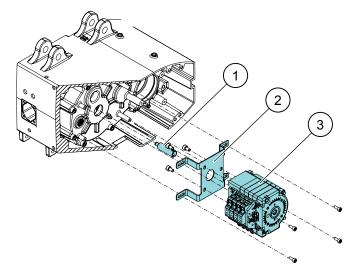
4-step rotating geared limit switch, SL05-SL10
